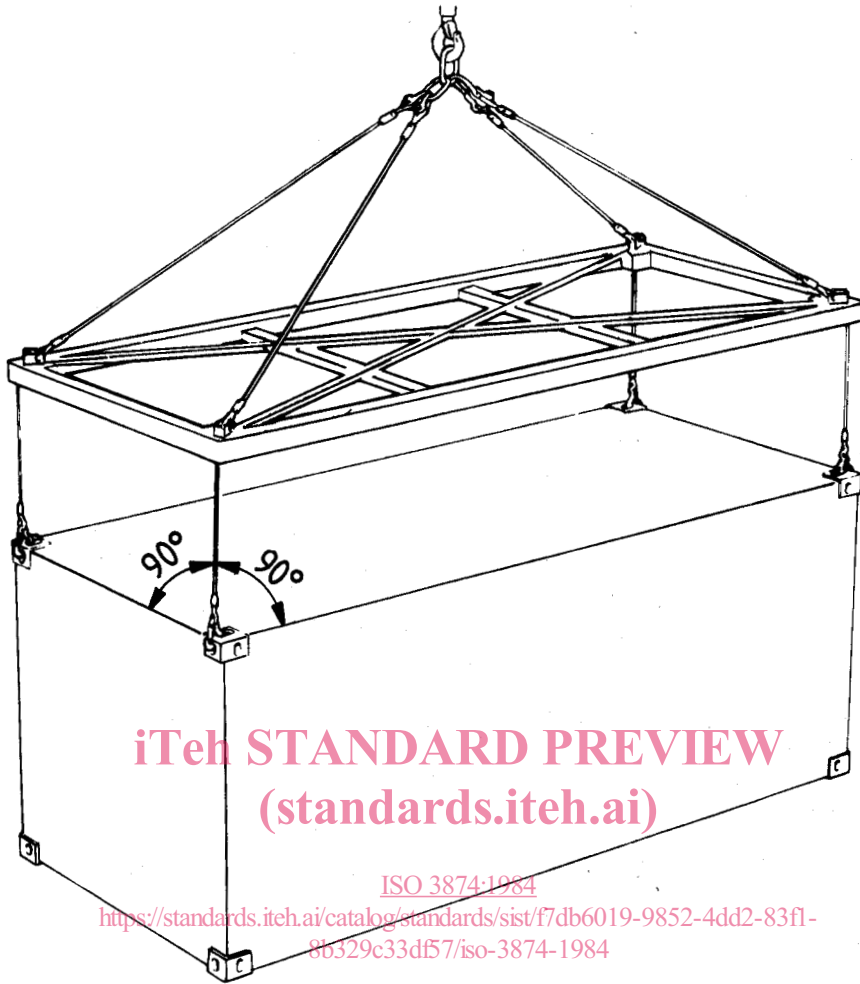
Example of lifting by spreader equipped with hooks, shackles or hand-engaged twistlock attachment
